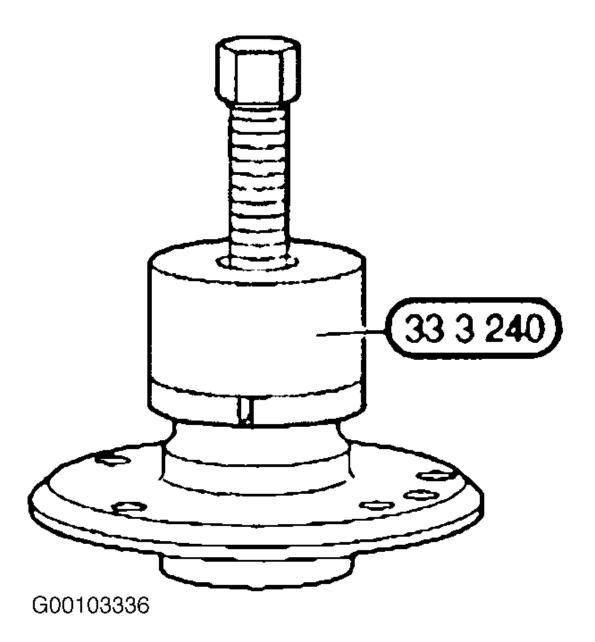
Removing Inner Bearing Race From Drive Flange Courtesy of BMW OF NORTH AMERICA, INC.
